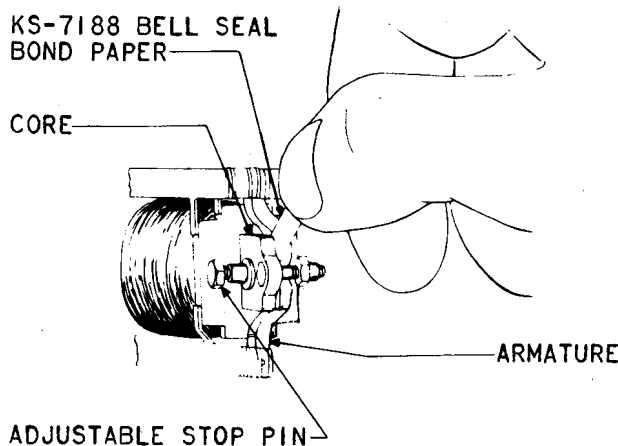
Method of Checking for Adjustable Stop Pin Position
